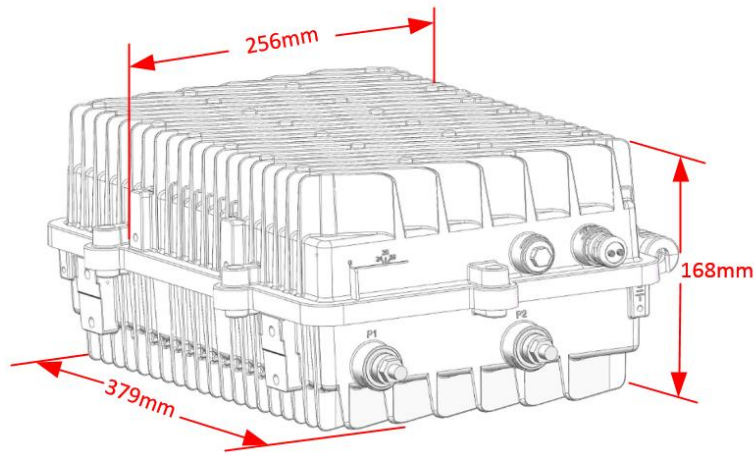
Appearance and dimensions of the SLINGSHOT NODE 3.0 CMTS
